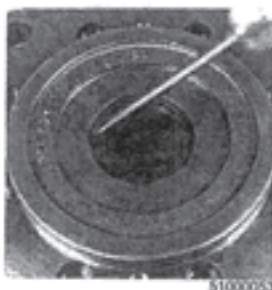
Remove Old Seal from Flange (SAE)
